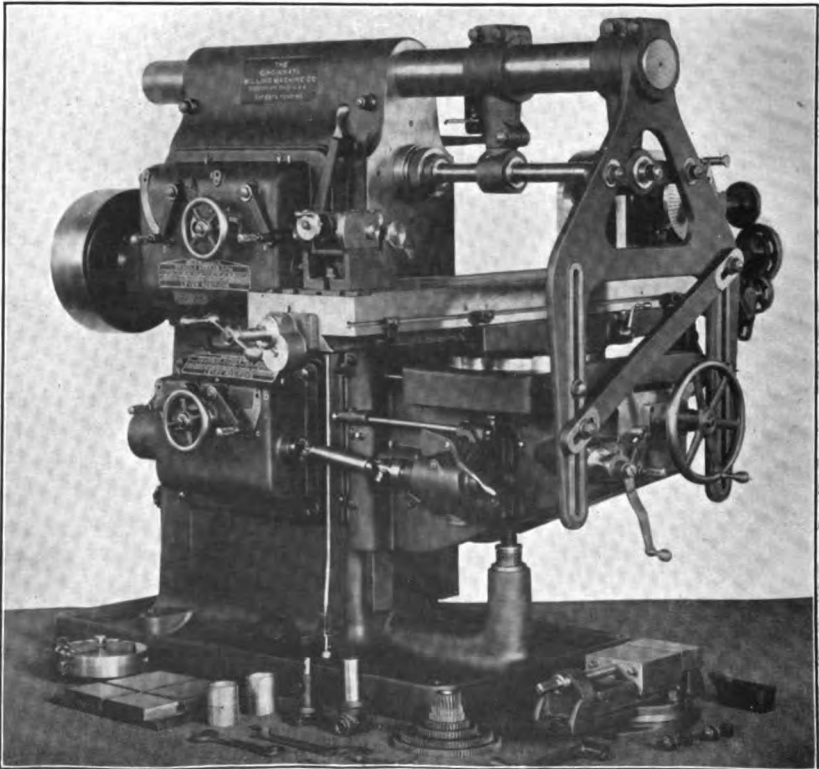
NO. 5 UNIVERSAL HIGH-POWER MILLER. CINCINNATI MILLING-MACHINE CO.
